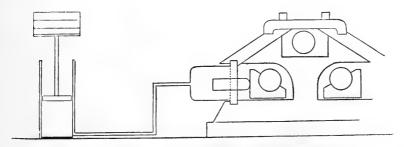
Diagram of hydraulic attachment to cane-mill.
